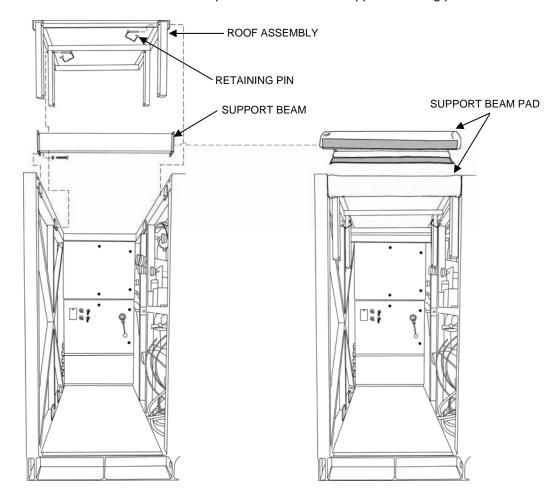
Operator Station Overhead Support Beam and Roof Packout.
